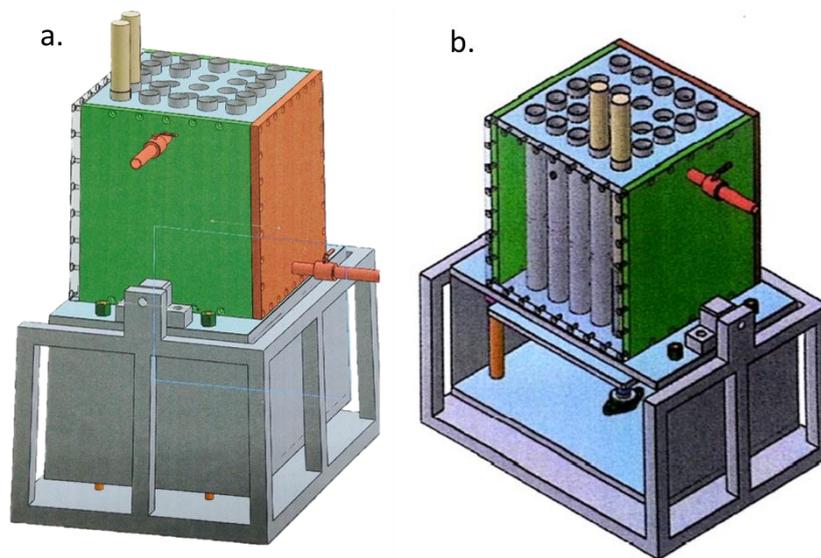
Diagram of the soap molder machine; a. Isometric View b. Sectioning View
